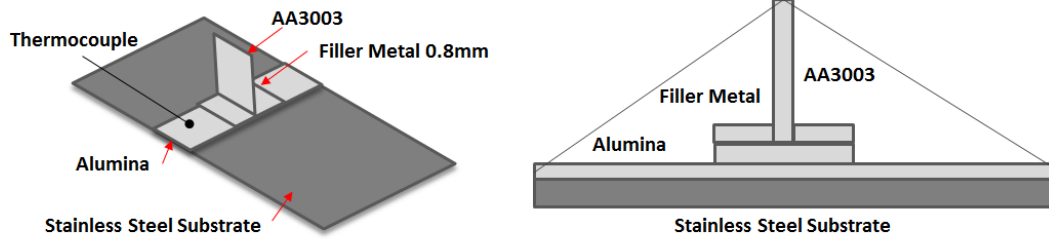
Trillium™ filler metal on non-wetting alumina horizontal surface configuration with thicker filler metal of 0.8mm
